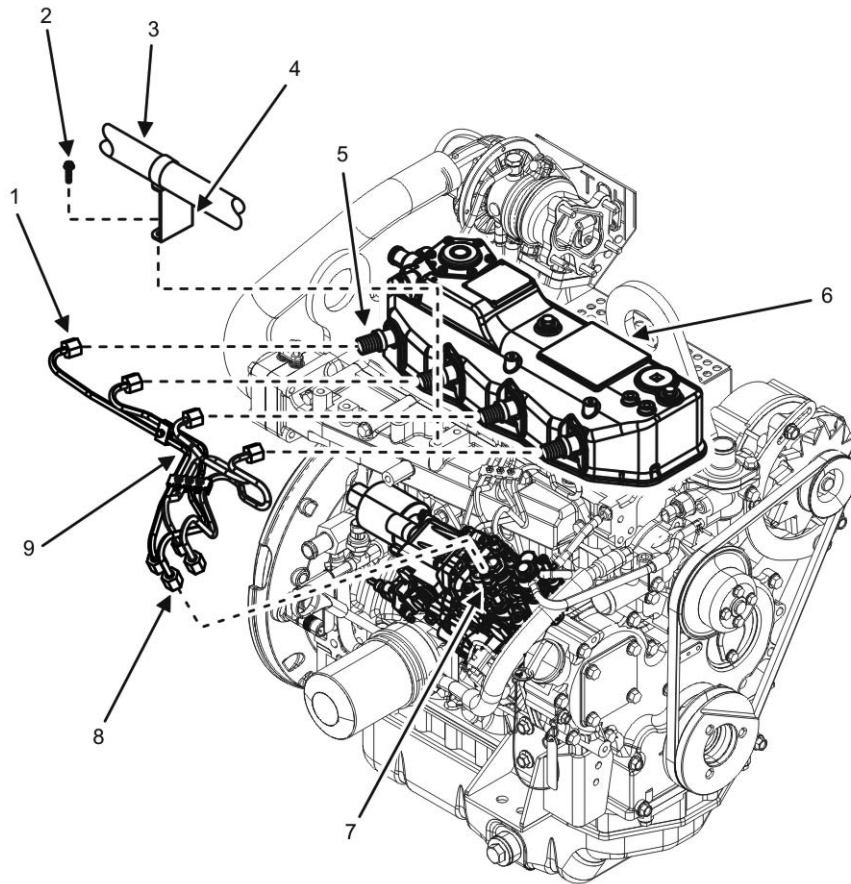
High-Pressure Fuel Injection Lines Detail — Removal.
